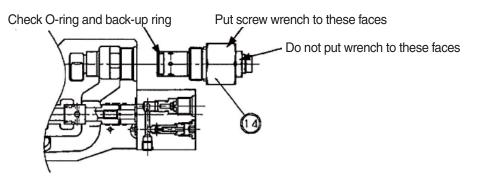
Check valve (Swing & boom swing, dozer, arm 3 & boom 3, service, arm, boom, bucket, arm 2)
